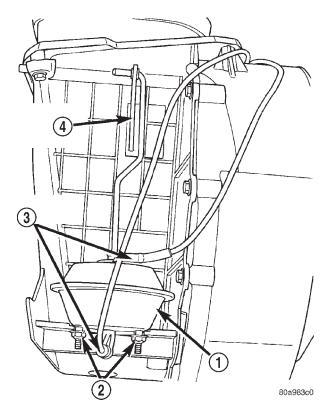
Recirculation Air Door Actuator Remove/ Install
